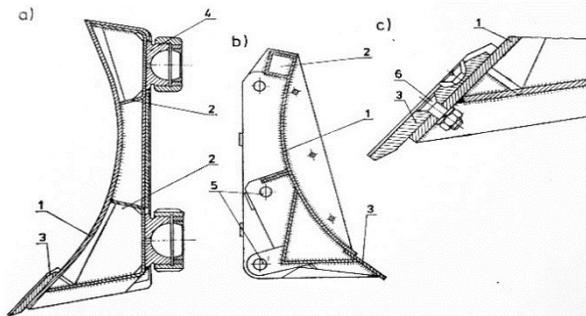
Examples of the dozer blades [4]: a) ball fitting b) joint fitting c) edge fitting; 1 - plate, 2 - reinforcement ribbing, 3 - cutting edge, 4 - sockets of the ball joints, 5 - holder, 6 - edge fixing bolt
